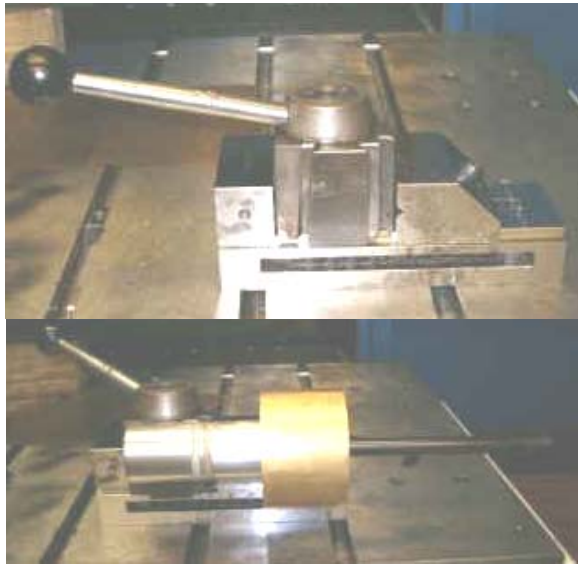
(Top) Photograph of dovetail tool post. (Bottom) Photograph of holder-boring bar assembly clamped to dovetail tool post.
